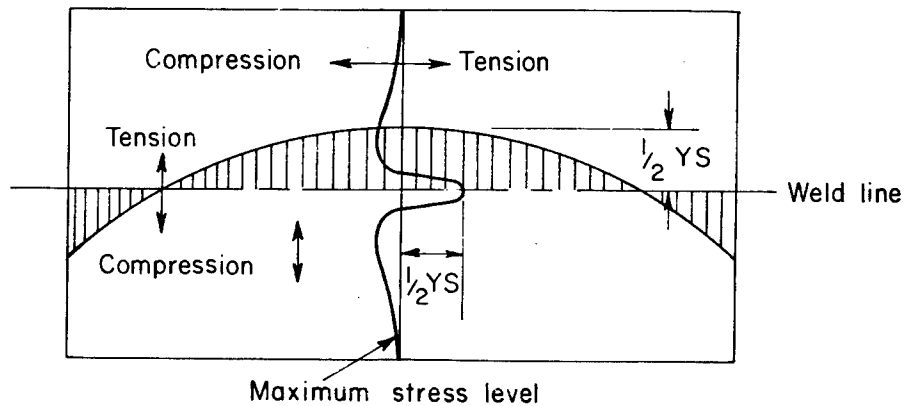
BOWING OF AN EDGE WELD
